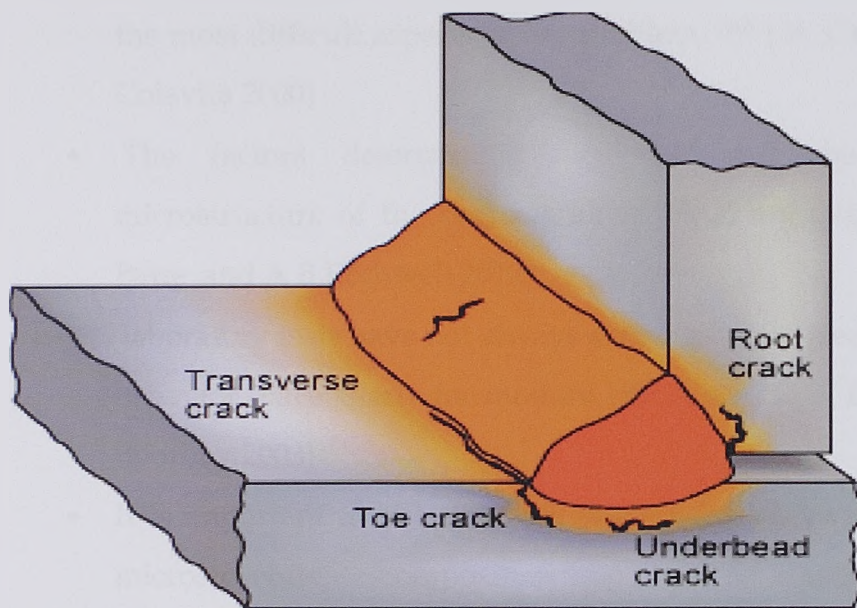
Hydrogen cracks originating in the HAZ and weld metal. [6]
